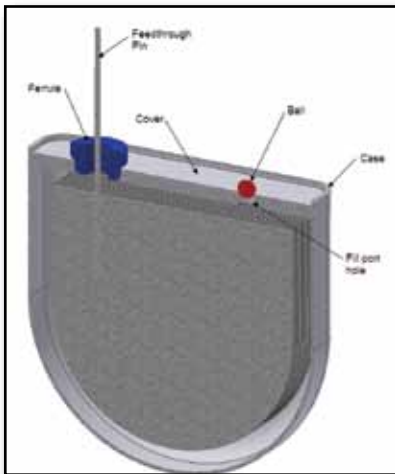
Generic medical device battery cross-section showing projection weld candidates: Ferrule (blue) and Ball (red)
